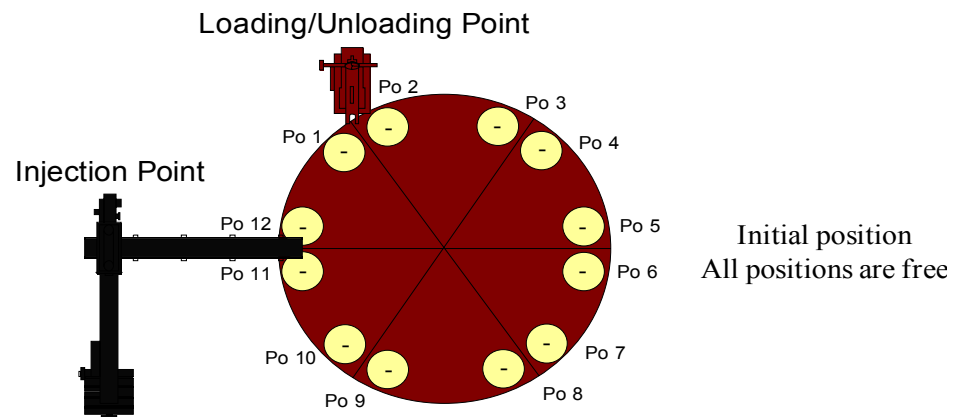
Initial Position of the Rotary Injection Molding Machine
